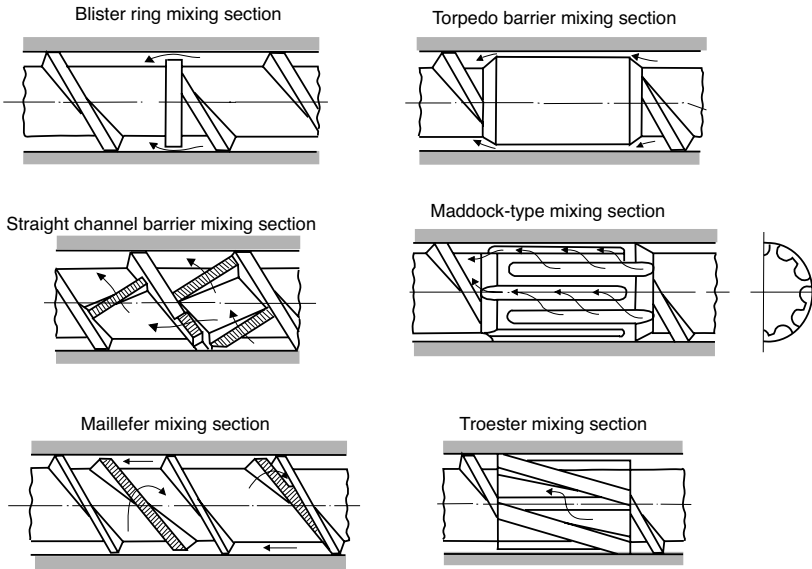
Commonly used single screw extruder dispersive mixing section.
